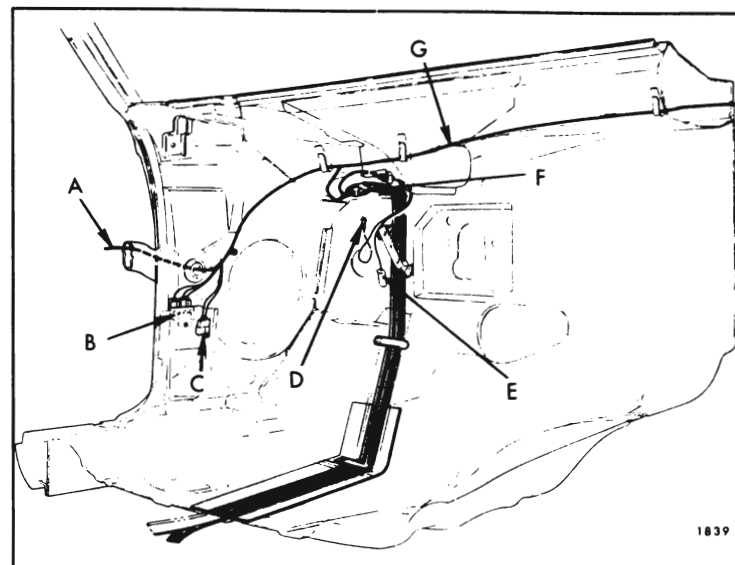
Front End Power Window Wiring - Oldsmobile "B-C & E"
